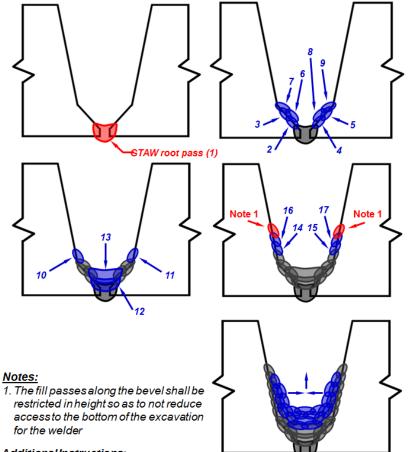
Schematic of the Controlled Fill Welding Procedure for Grade 91 Steel for a Partial <u>Penetration</u> Weld Repair of a Circumferential Girth Weld.
